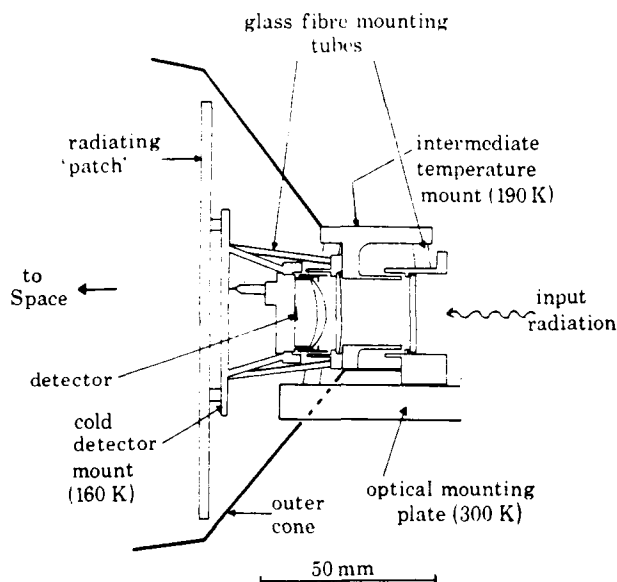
The s.a.m.s. cold detector assembly (InSb). The mount is in three parts: the detector mount at 160 K, the intermediate lens mount at 190 K and the mechanical interface at 298 K. The parts are interconnected by 8 glass fibre tubes, some of which may be seen in the diagram. The relative sizes of the 'radiating patch', which is black-painted, and the outer cone, which is coated with vapour deposited aluminium, can be seen in figure 8.
